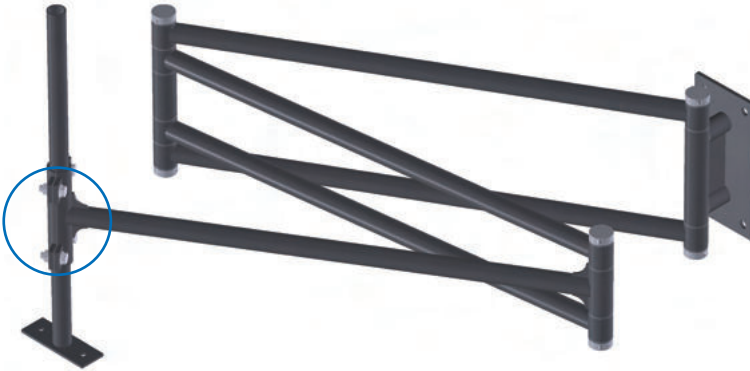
The Front Beam Mounting comprises a scissor arm with a mounting tube for the rear Sensor Beam
